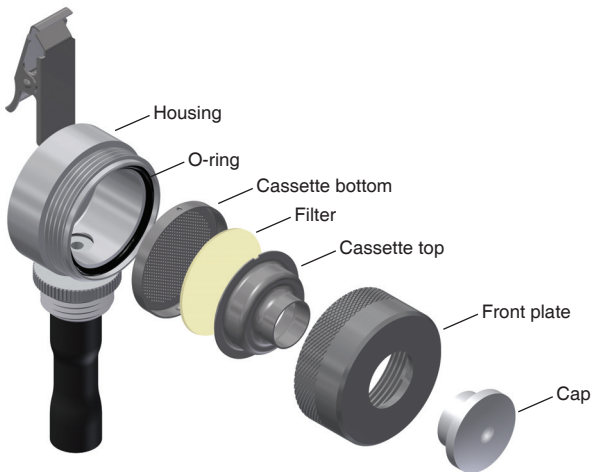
IFV Pro Sampler: Sampling Head and Sorbent Tube Holder
